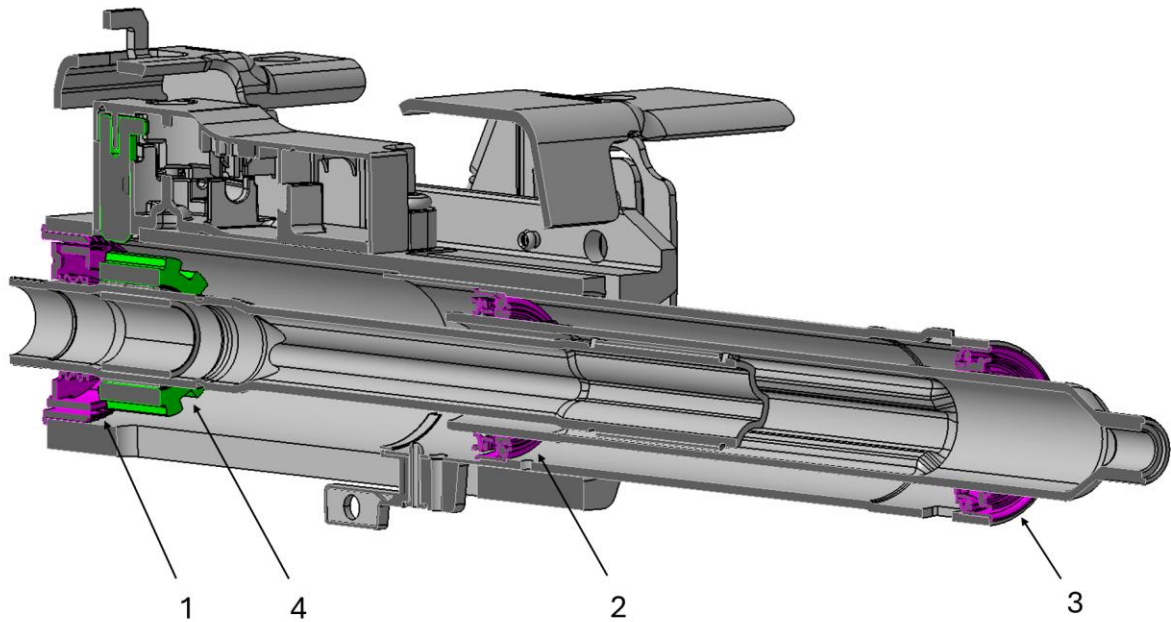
Shows a section view of the steering column, marked in pink are the bearings and marked in green are the steering lock.
